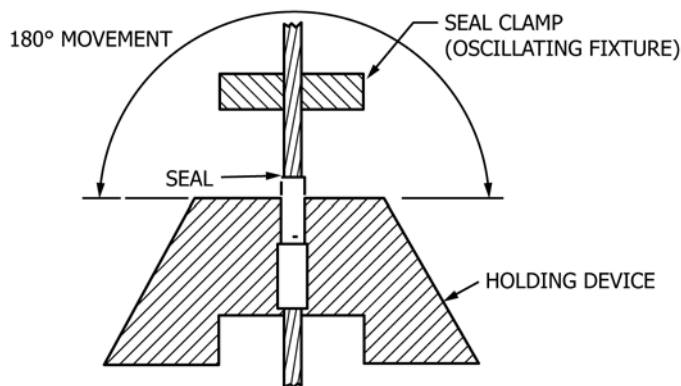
Schematic Drawing of Bending Test Fixture as Applied to Groups 1 and 2
